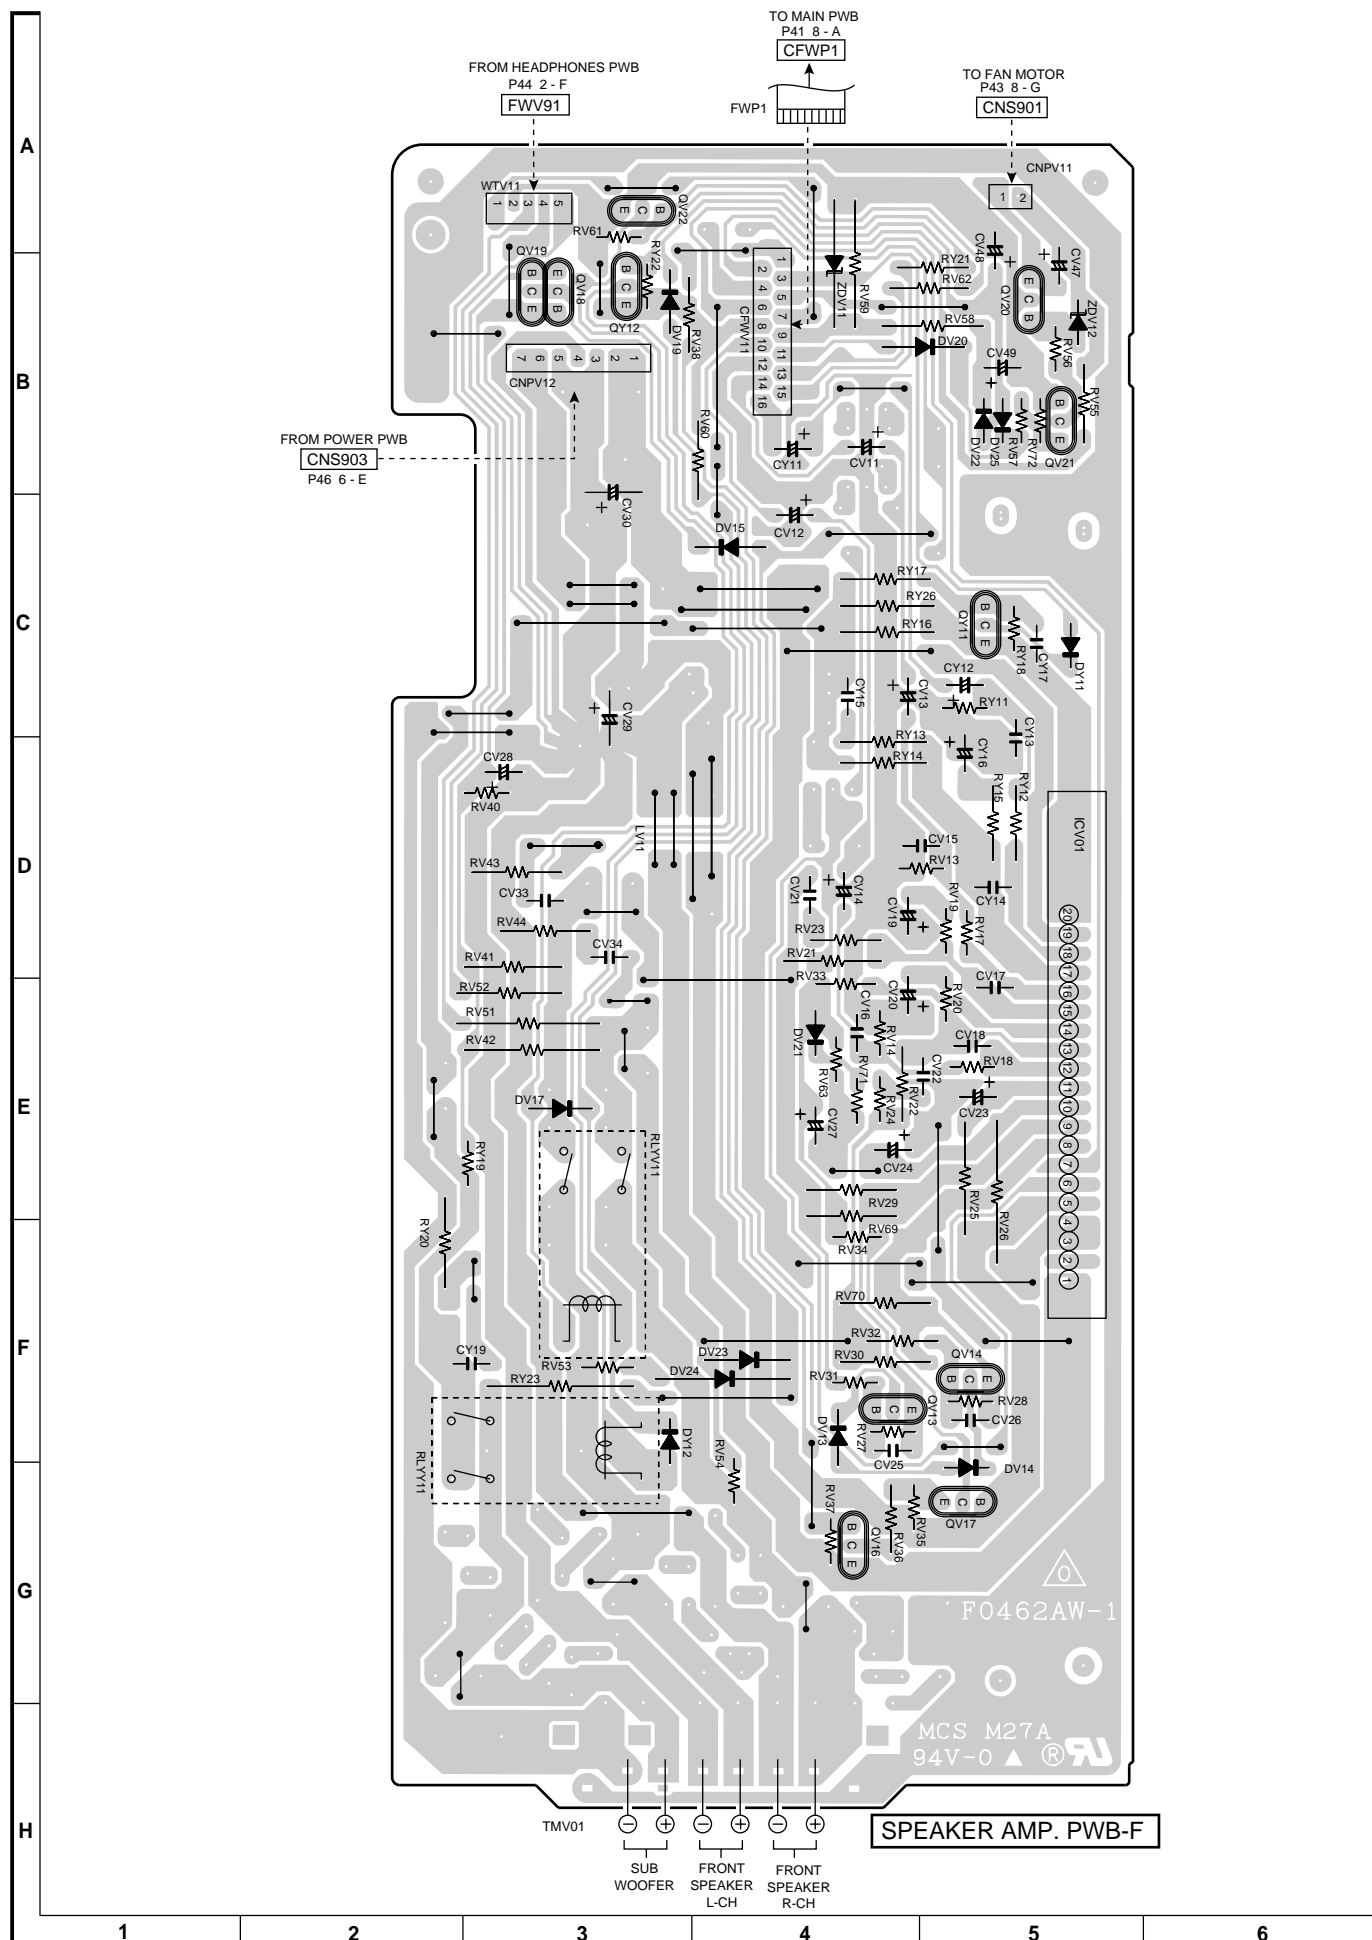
WIRING SIDE OF P.W.BOARD (9/9)
